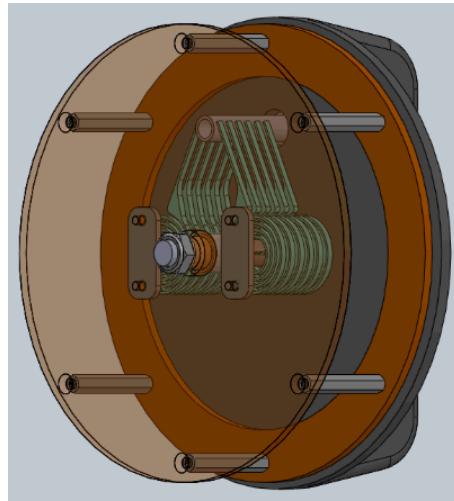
Perspective view of the resistance puck showing the new front plate that allows 180° of clockwise and counter-clockwise rotation
